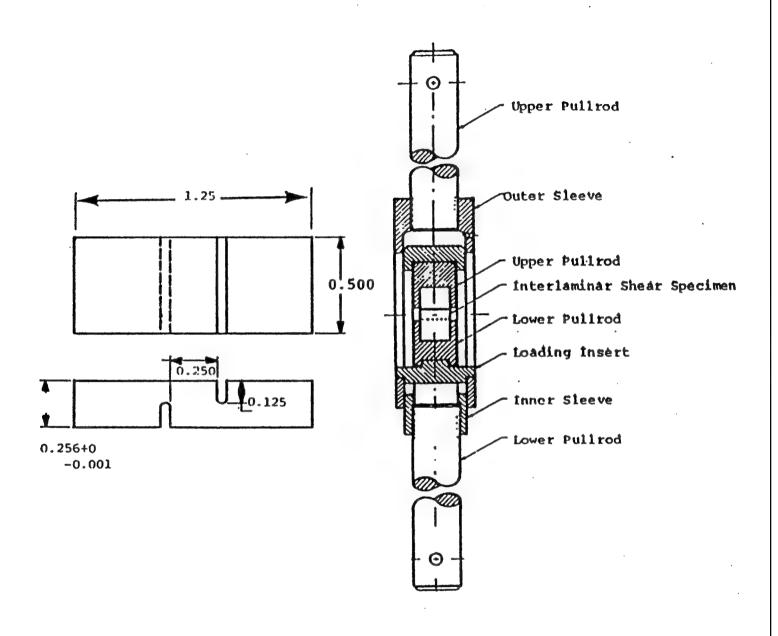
Specimen Configuration and Loading Fixture for the Interlaminar Shear Test
